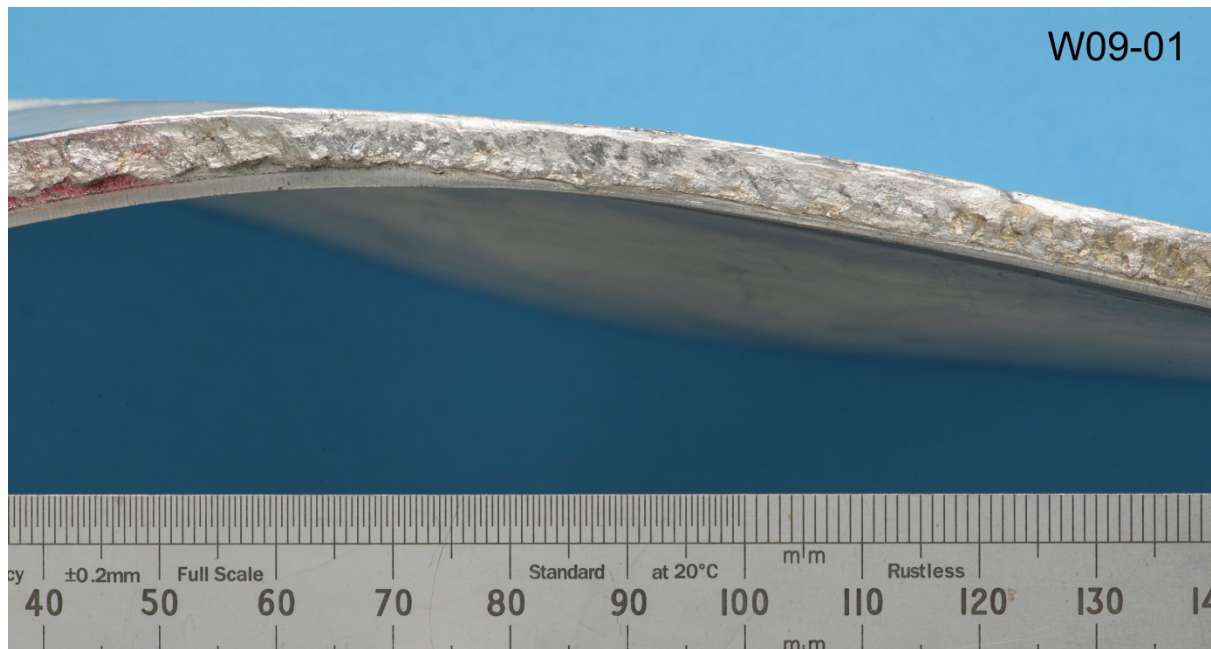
J2580 sample W09-01 fracture surface (centre).
